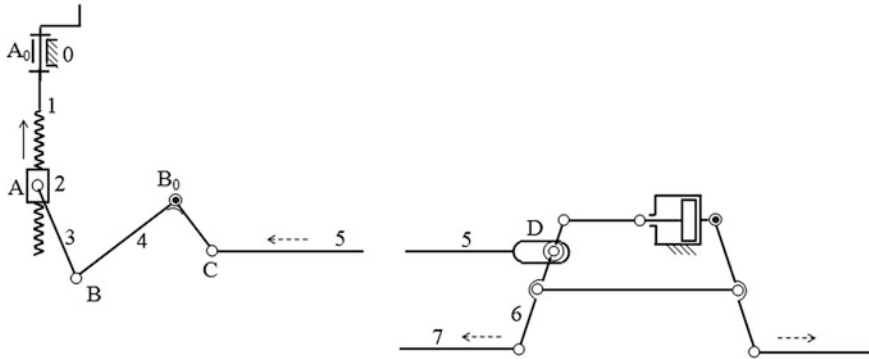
The kinematic scheme of the carriage handbrake linkage with driving screw
